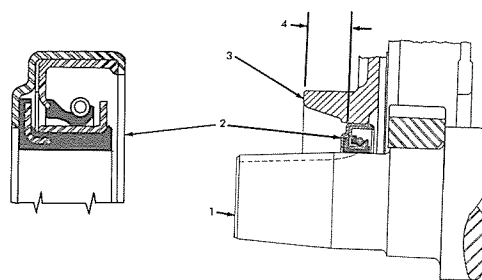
Crankshaft Front Oil Seal Location (T-71020)
